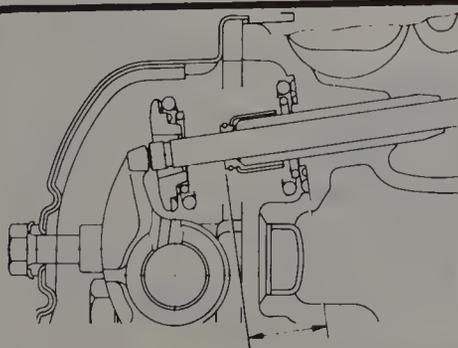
The valve seals must be pressed onto the guides until they are the specified distance from the spring seat (Sec 16)
